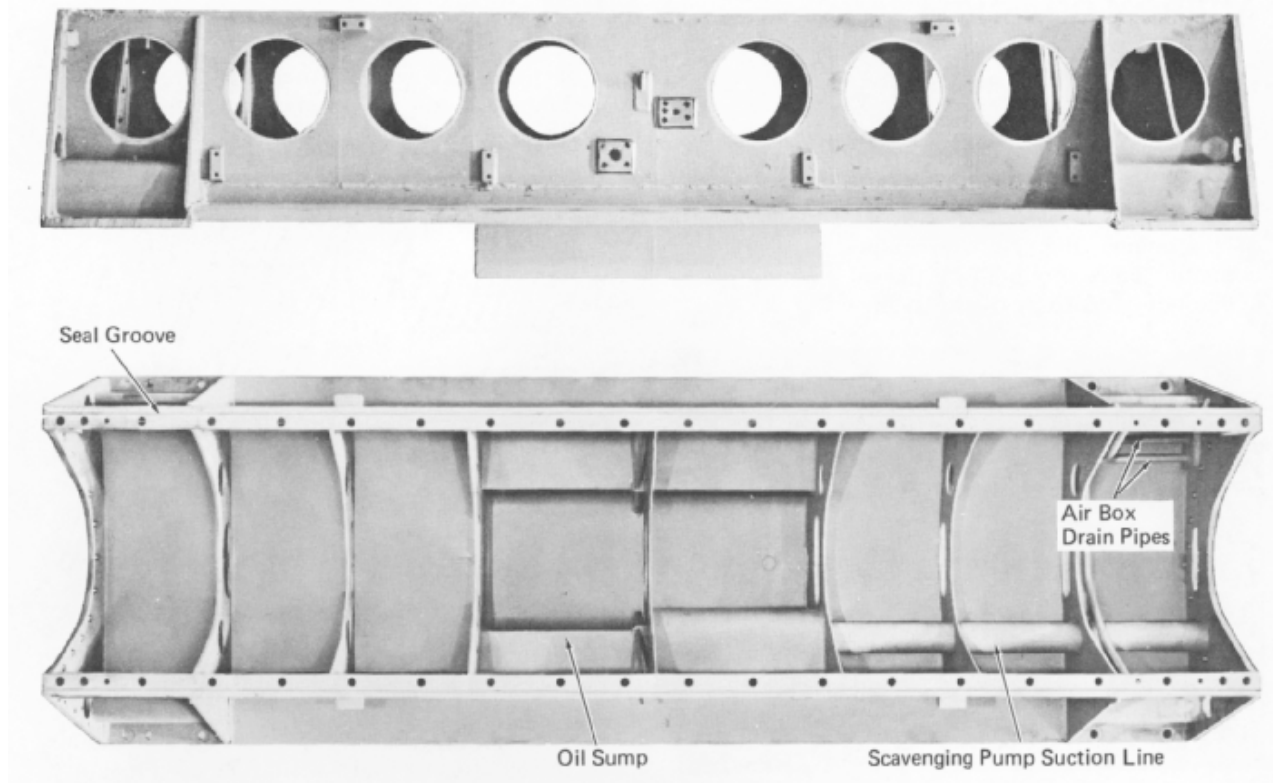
Typical Oil Pan (16-Cylinder)
